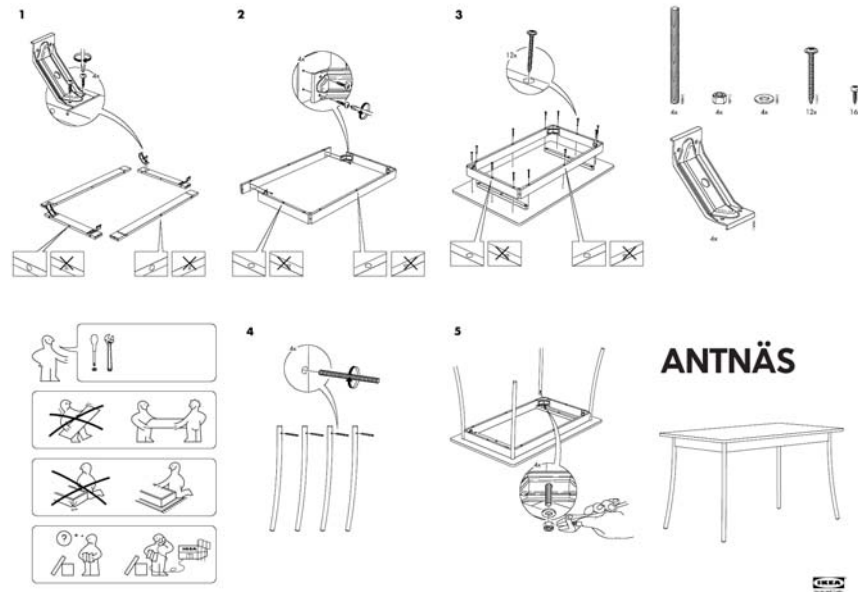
The 3D assembly instruction for the IKEA dining table
